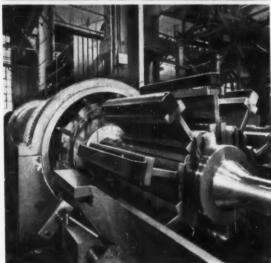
Cylinder, 8 feet long with 23-inch diameter bore, being finished on a modified horizontal honing machine.
